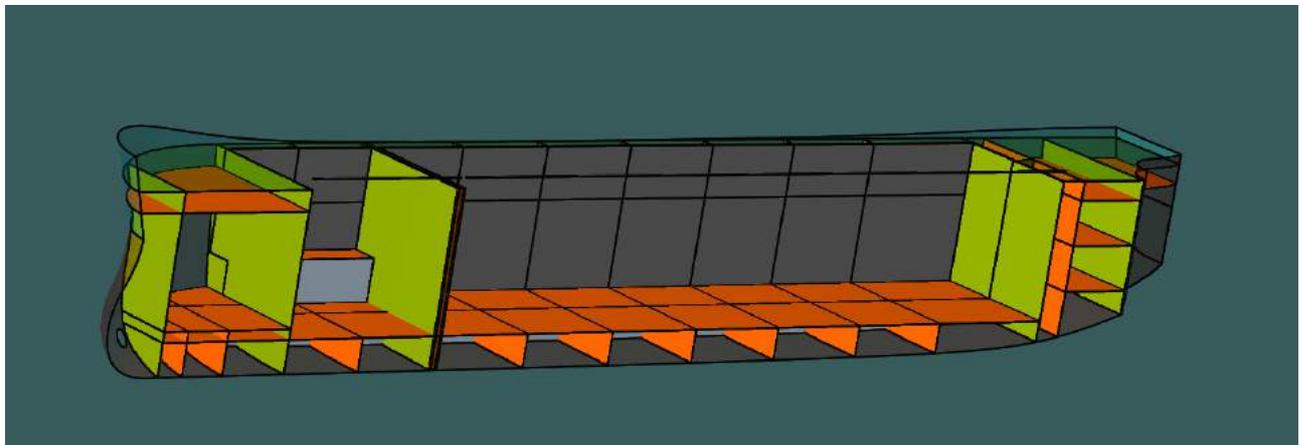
Cross Section of Double Bottom, (top)side Tanks
